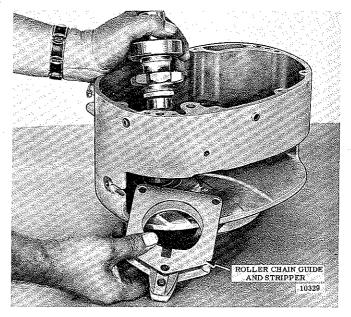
Chain Guide and Stripper Being Removed From Frame as Sprocket Shaft is Lifted Out (Roller Chain Model)
